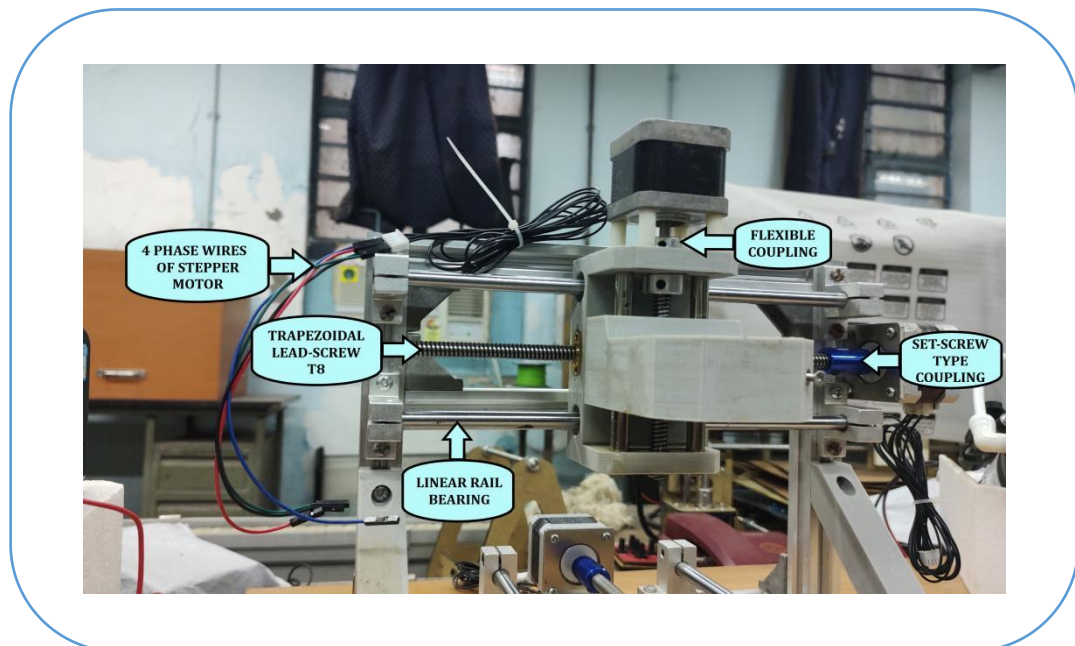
X-axis carriage with couplings and leadscrew in assembly
